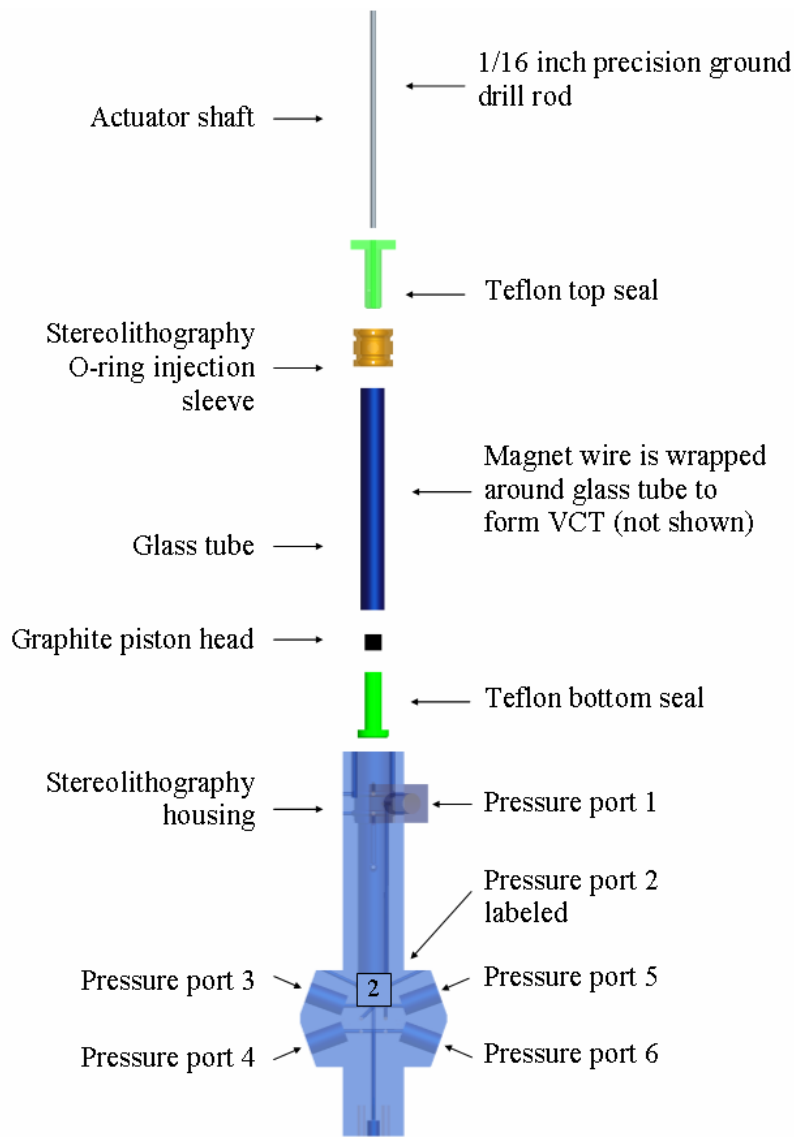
Exploded CAD model of Fluidic Actuator (Valves Not Shown)
